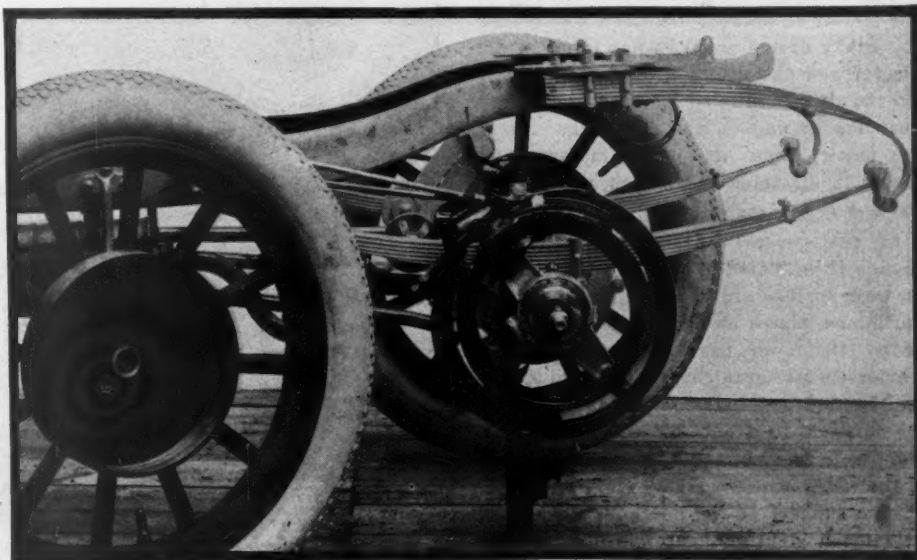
REAR END AND BRAKE CONSTRUCTION OF PIERCE-ARROW CHASSIS
